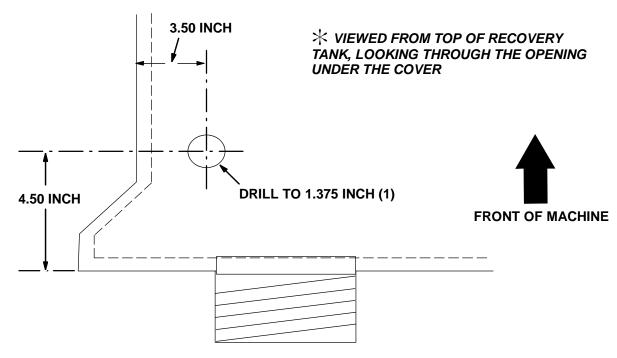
Bulkhead Fitting Dimension In Bottom Of Recovery Tank
